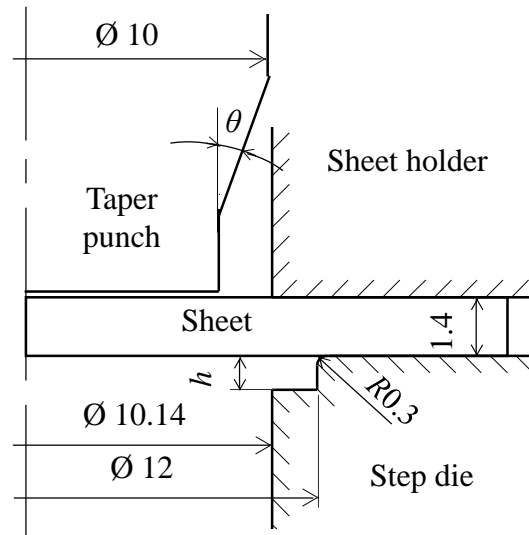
Dimensions of tools used in punching process including thickening of hole edge of ultra-high strength steel sheet.
